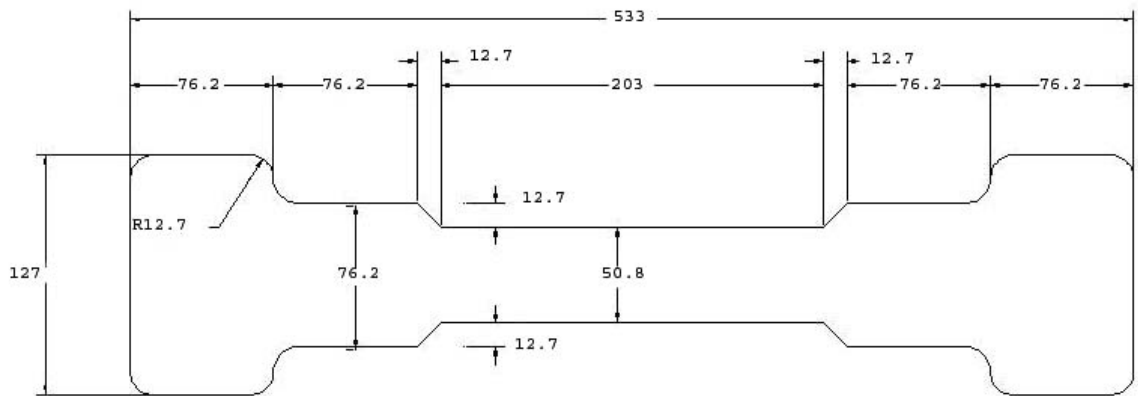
Specimen dimension of tensile dogbone specimens (mm)
